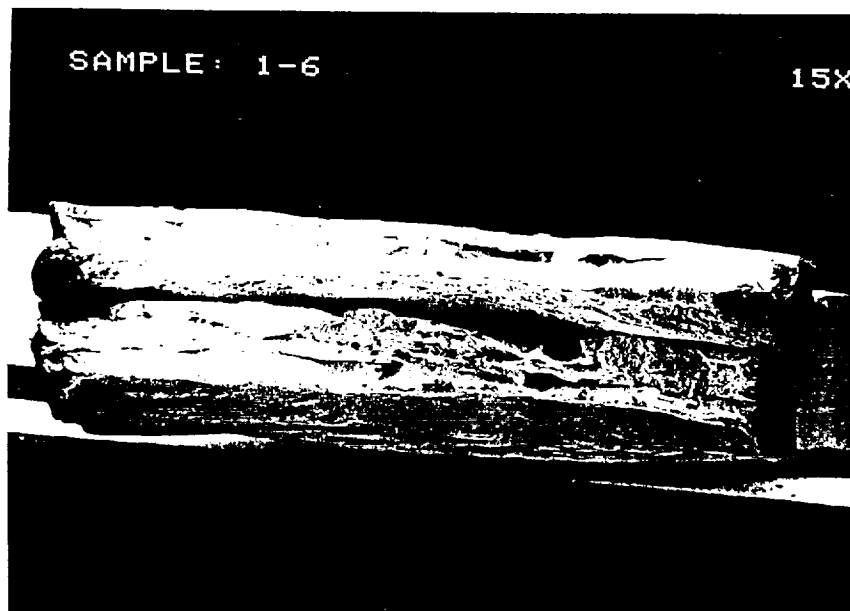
SEM view of fracture in tensile specimen 1-6, 3400F, annealed. 20X.
